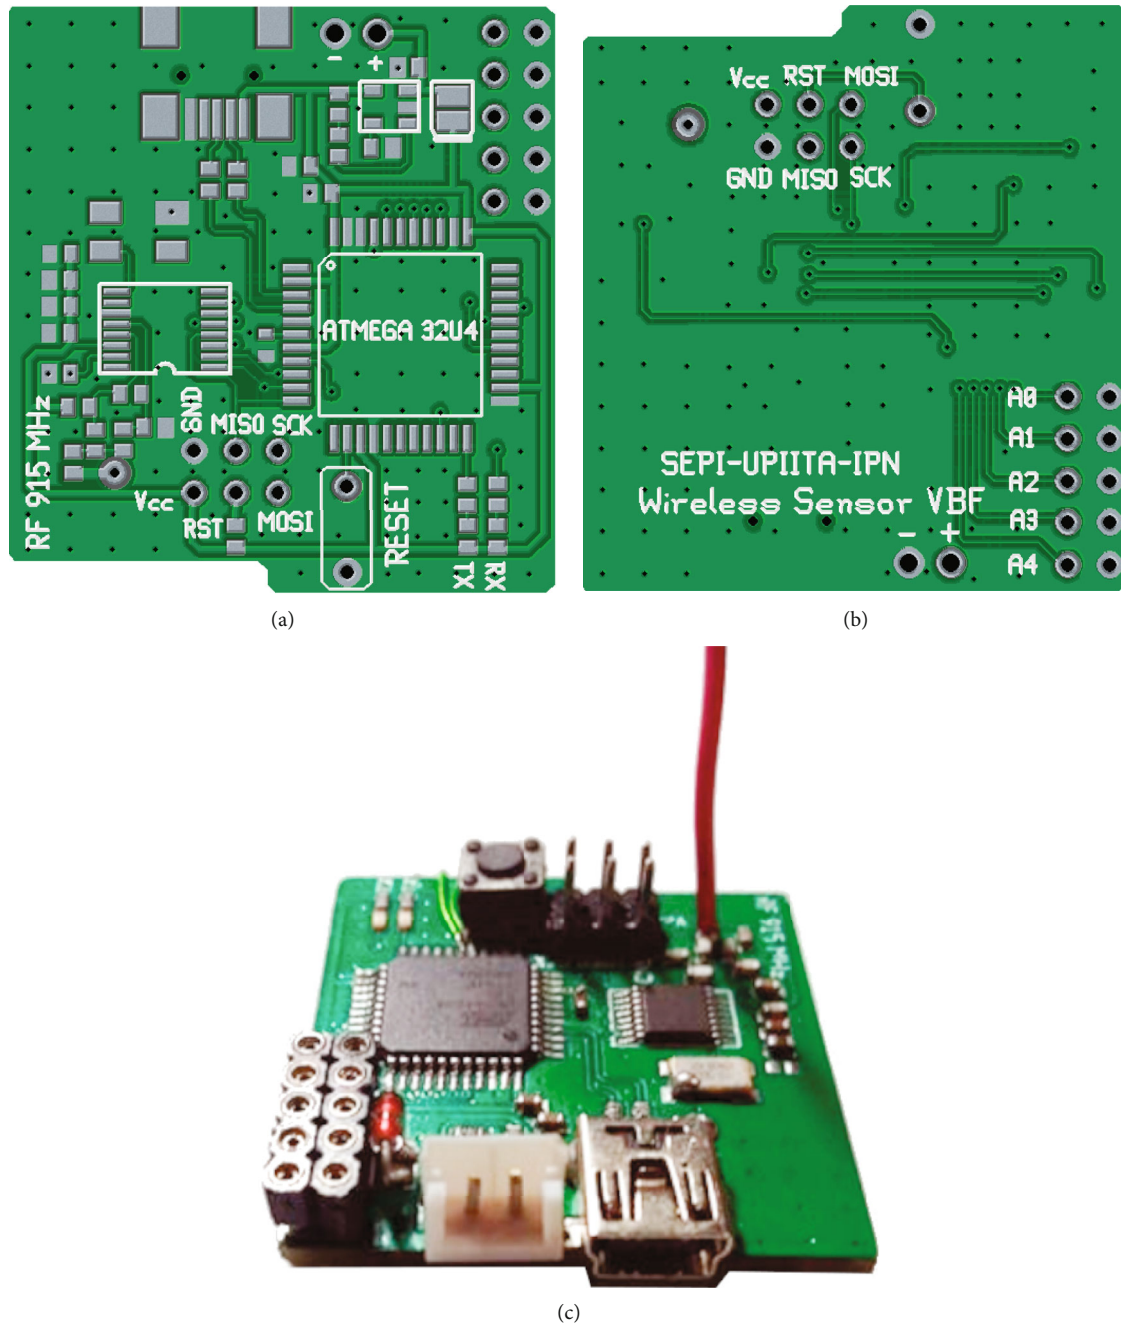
Layout of the prototype of a wireless sensor: (a) upper view of the PCB; (b) lower view of the PCB; (c) assembled prototype.
